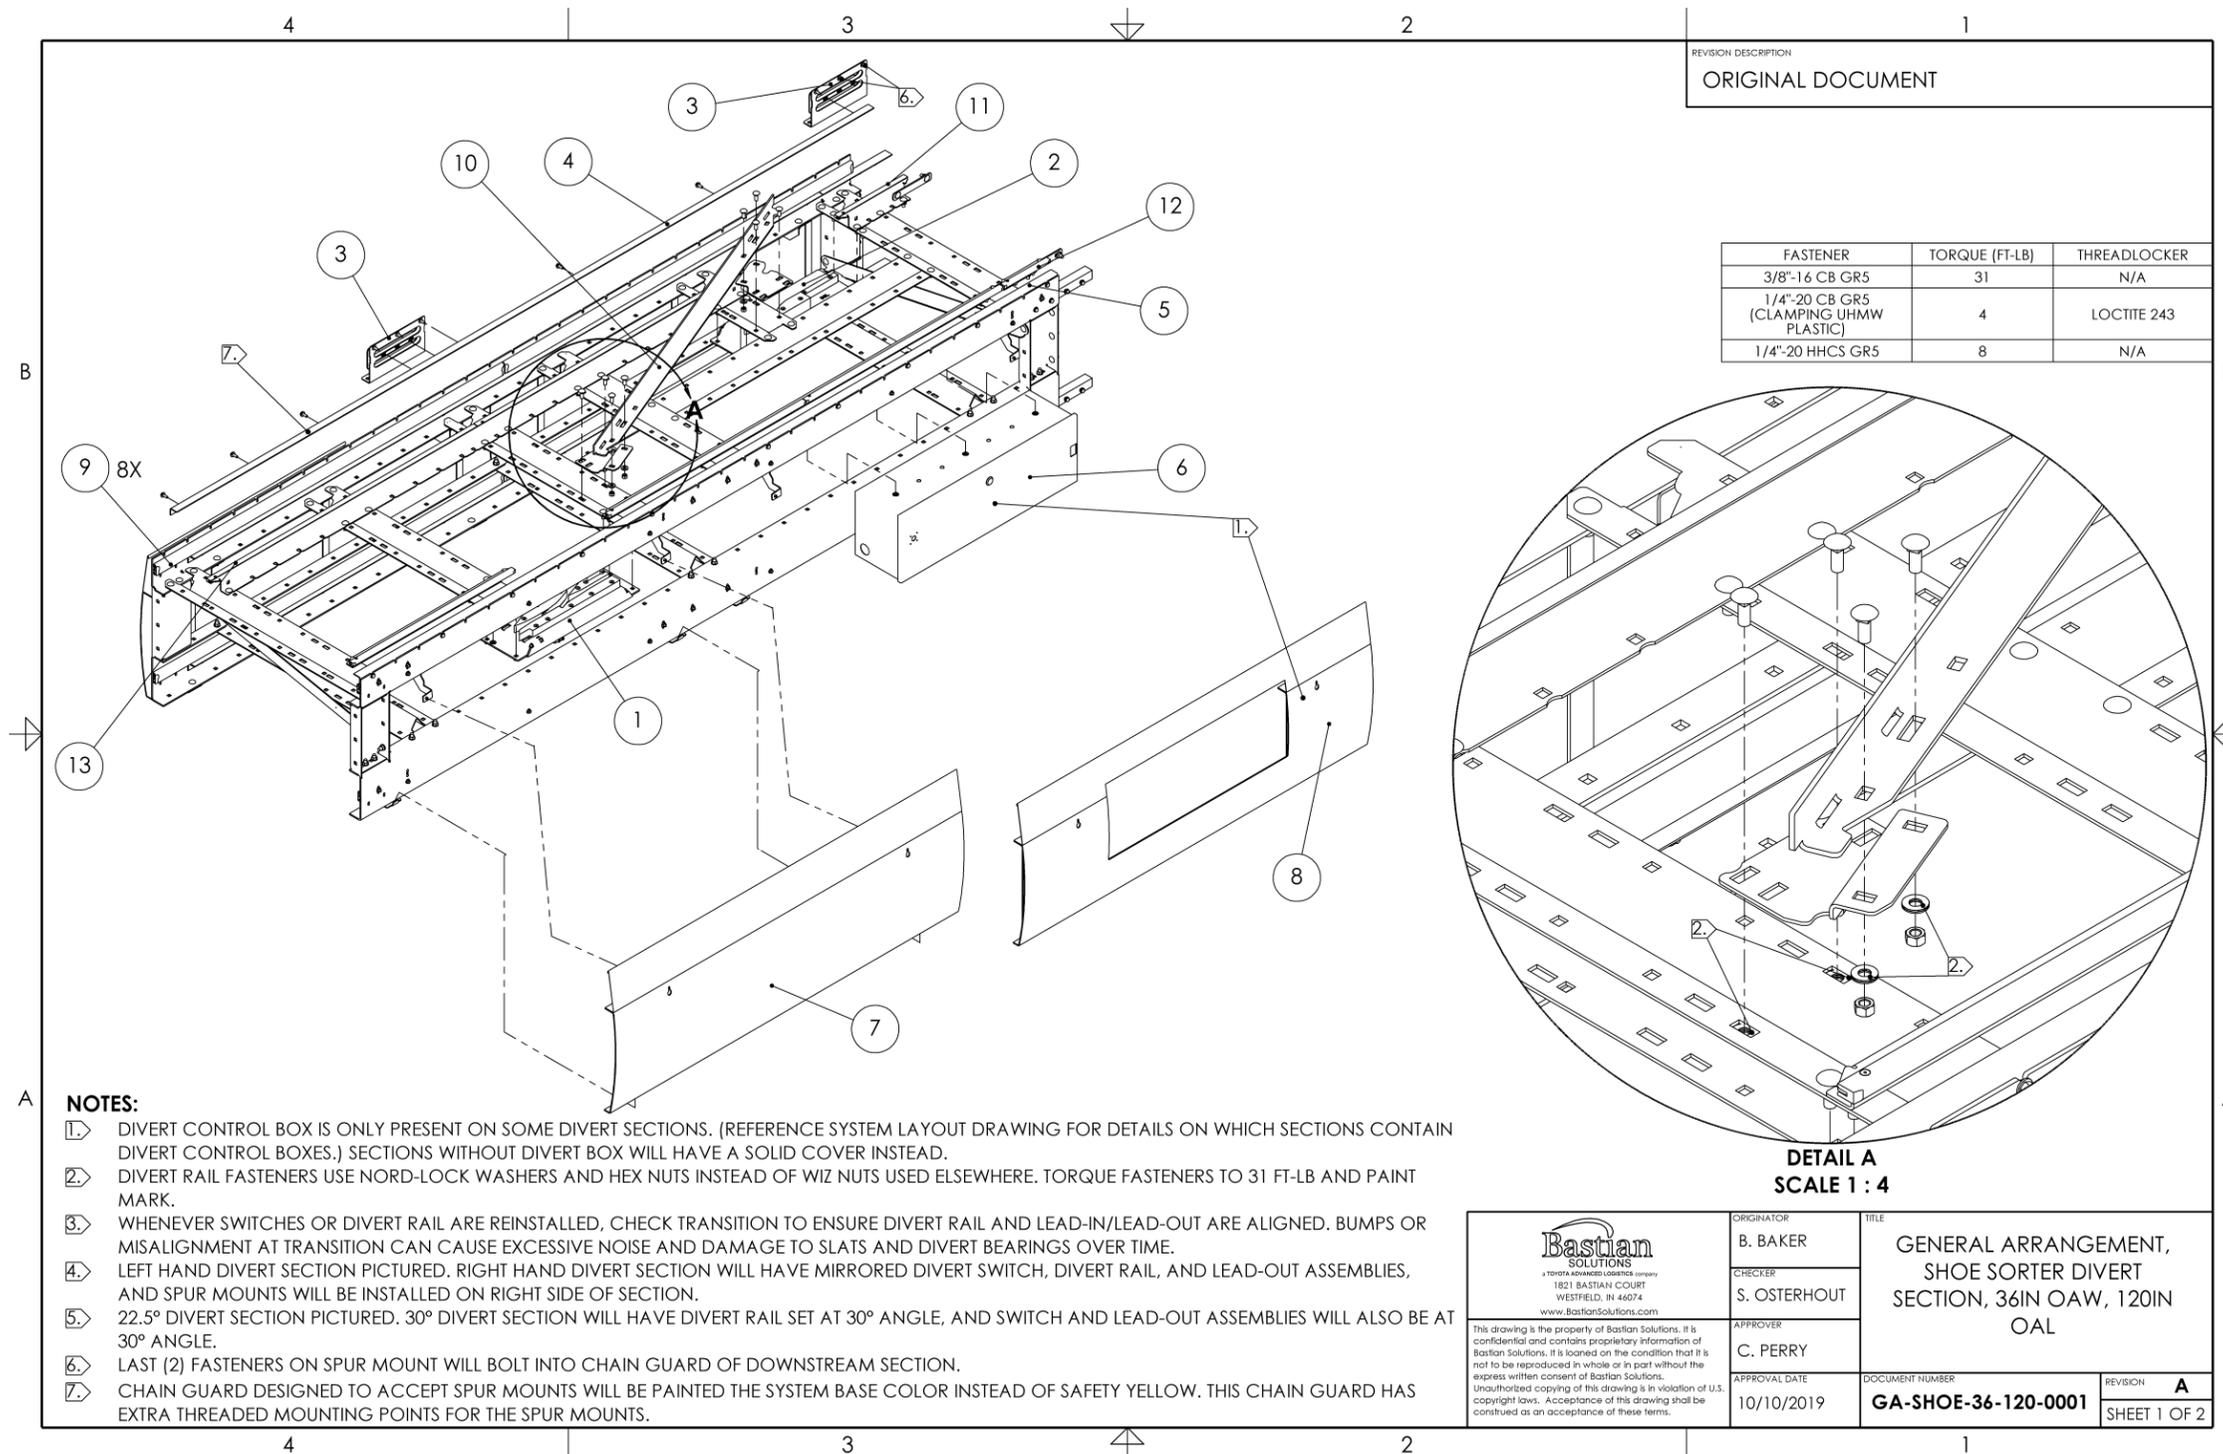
General Arrangement, Shoe Sorter Divert Section, Sheet 1 of 2
